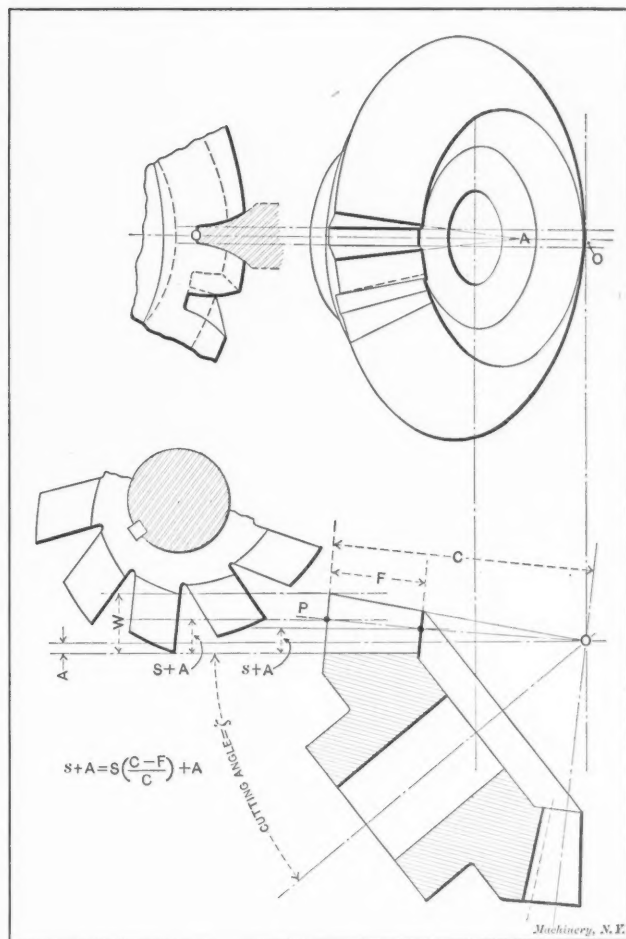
Relative Positions of Cutter and Blank when taking Central Cut of fairly coarse pitch it is best to cut clear around it with this setting, thus roughing out all the tooth spaces. On fine pitch gears this roughing cut is unnecessary.
